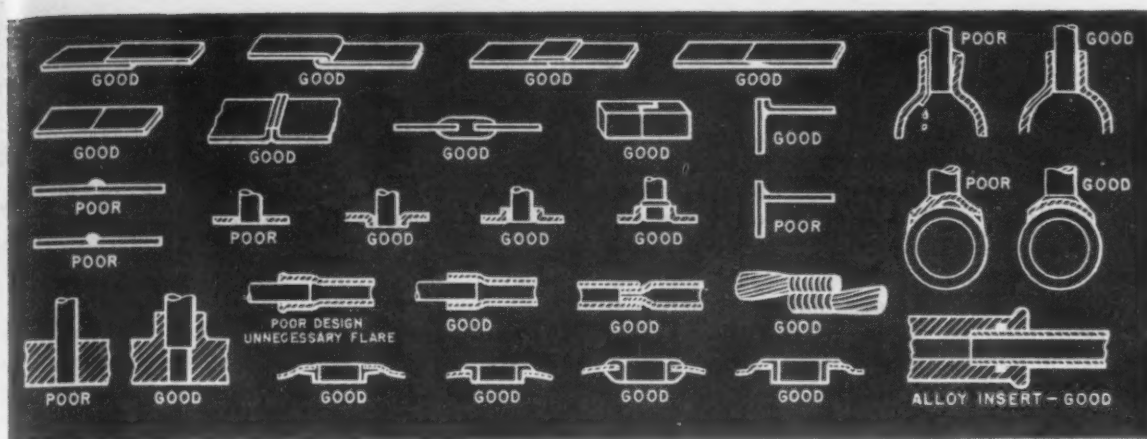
Good and bad joint designs for silver brazing stainless steel.
